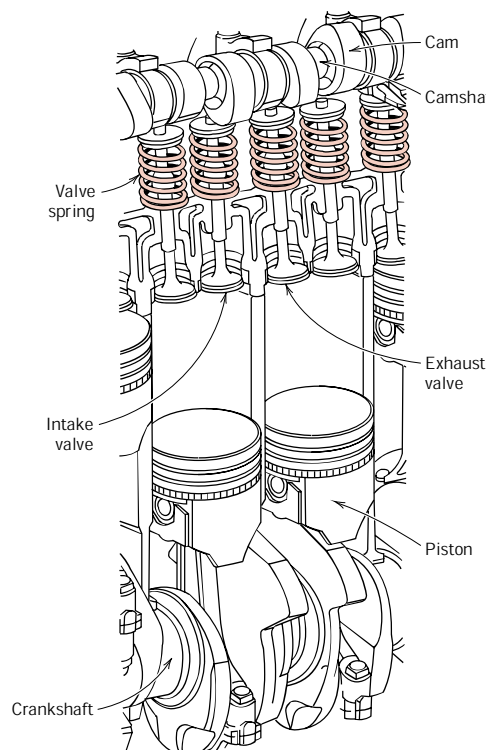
Cutaway drawing of a section of an automobile engine in which various components including valves and valve springs are shown.
